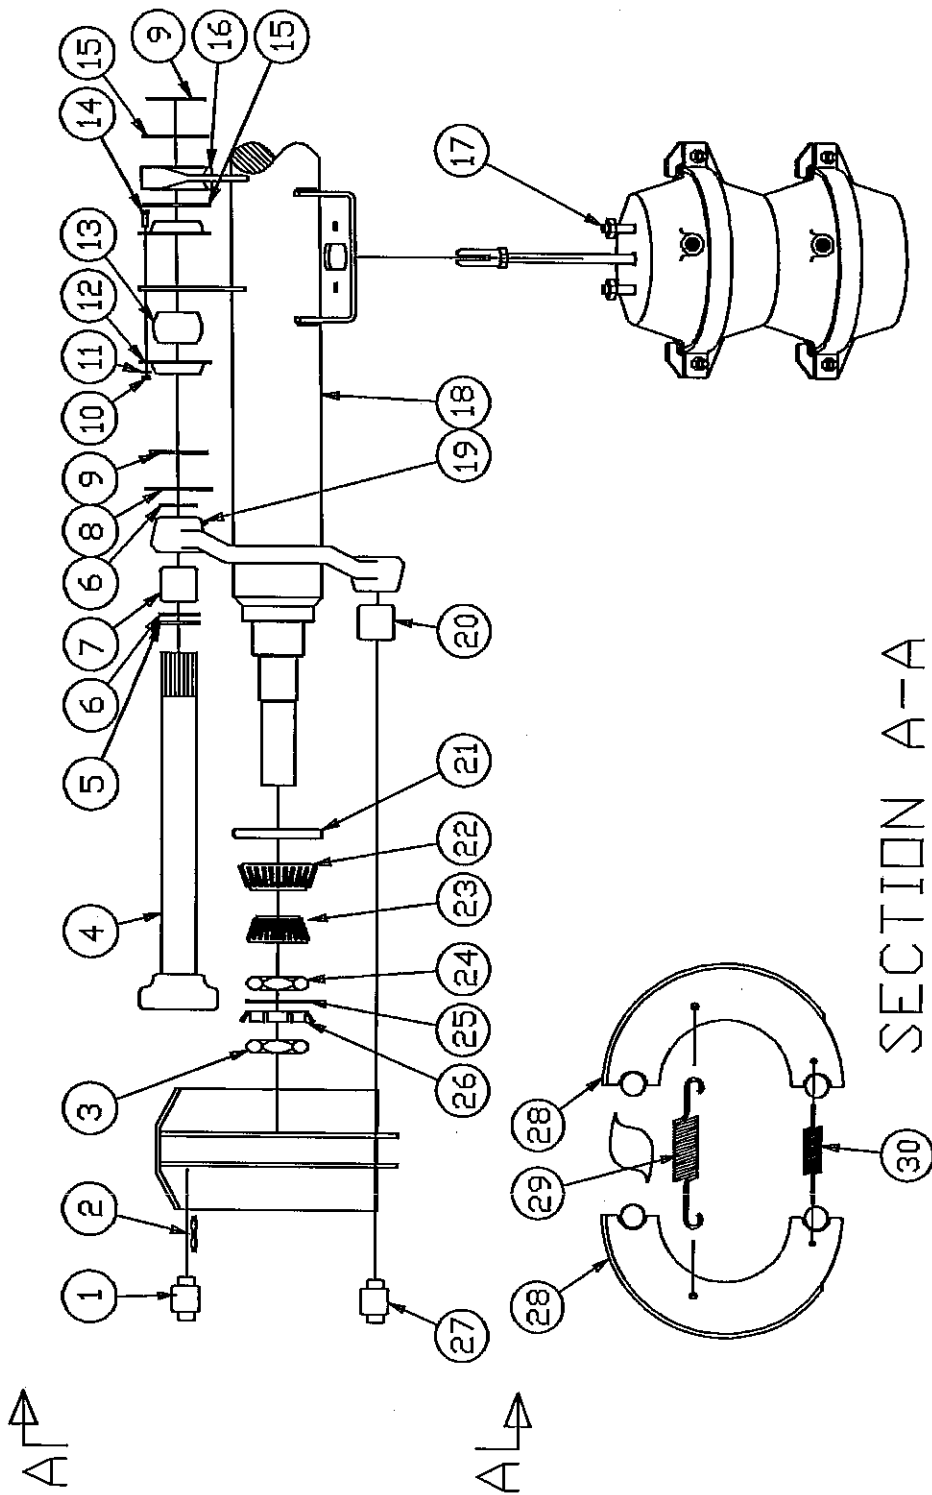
BRAKE/AXLE TERMINOLOGY
